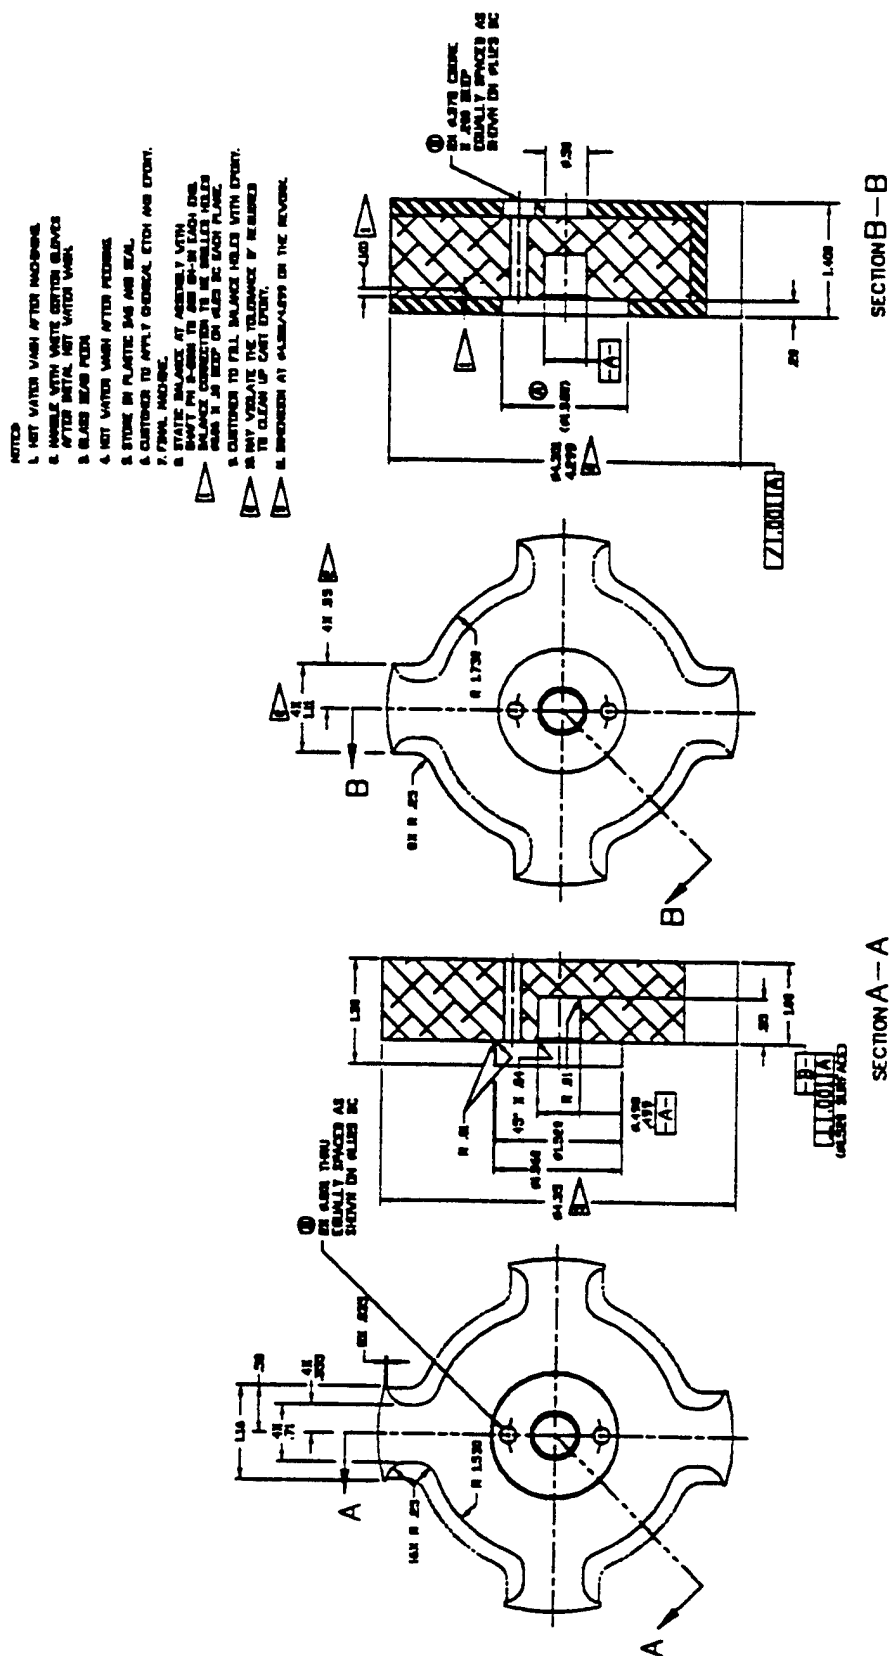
Rotor 1 Design Drawing (Adapted from Tech Development, Inc., Dayton, Ohio)
